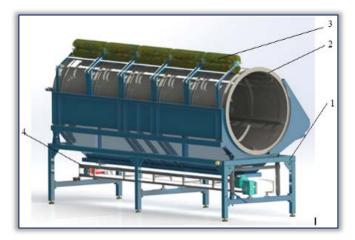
Onmak Makina grape seed separator, Turchi [21] 1 – Metalic frame; 2 – Rotary cylindrical sieve; 3 –exterior rotary brush; 4 – rubber belt conveyor
